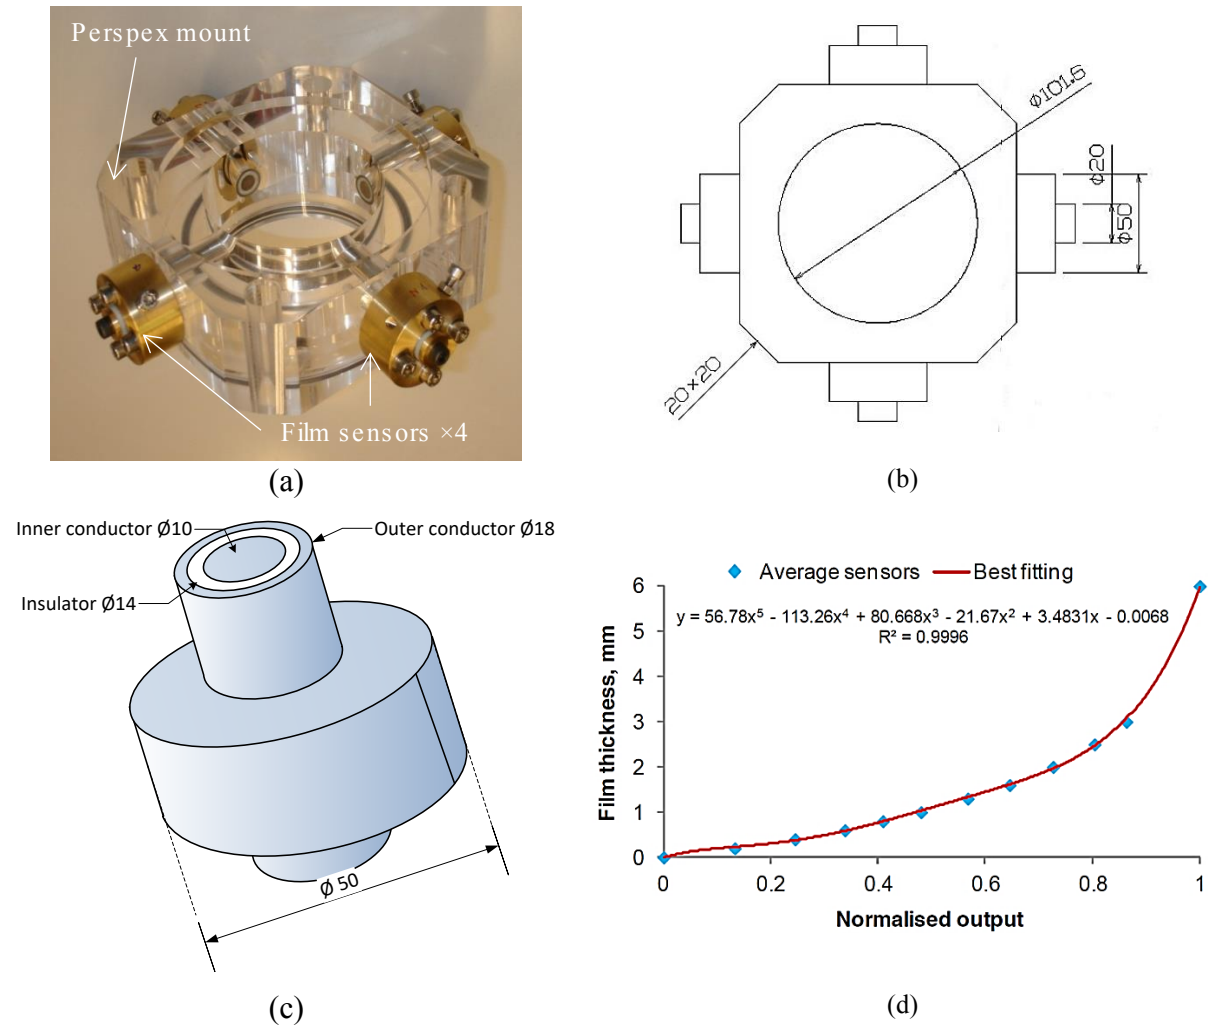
(a) Film thickness sensor spool, (b) Illustration showing dimensions of spool and outer parts of sensor, (c) Details of conducting and insulating parts on the flush side of probe in contact with liquid film, (d) An example of calibration curves used to obtain film thickness from normalised voltage measurements
